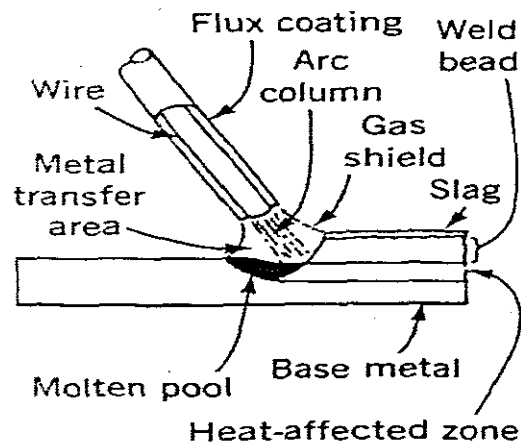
Depicting the MMA process (from Welding and Welding Technology)
